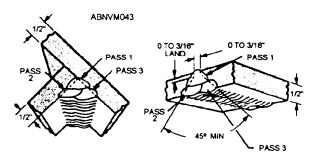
Joint design and weld pass sequence vertical-position multipass fillet and butt welds.
